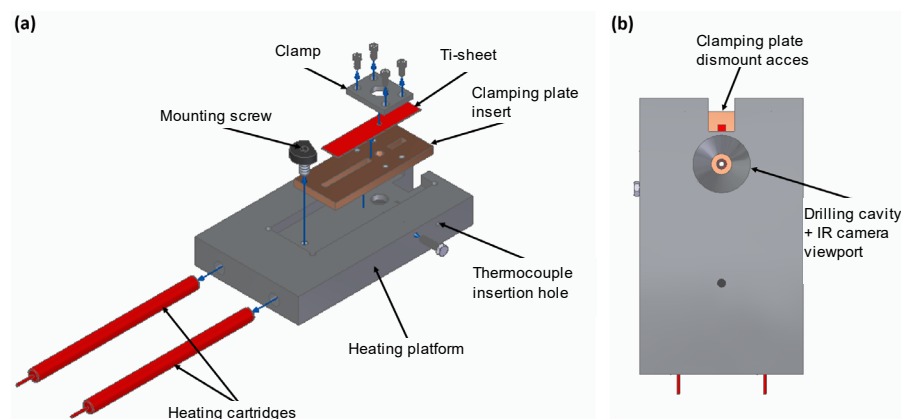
CAD drawing of the heating platform: (a) Exploded view, (b) Bottom view.
